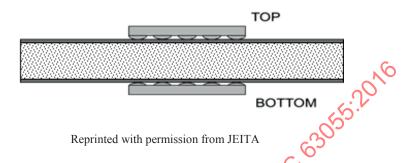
Explanatory drawing of TOP and BOTTOM module mounting
